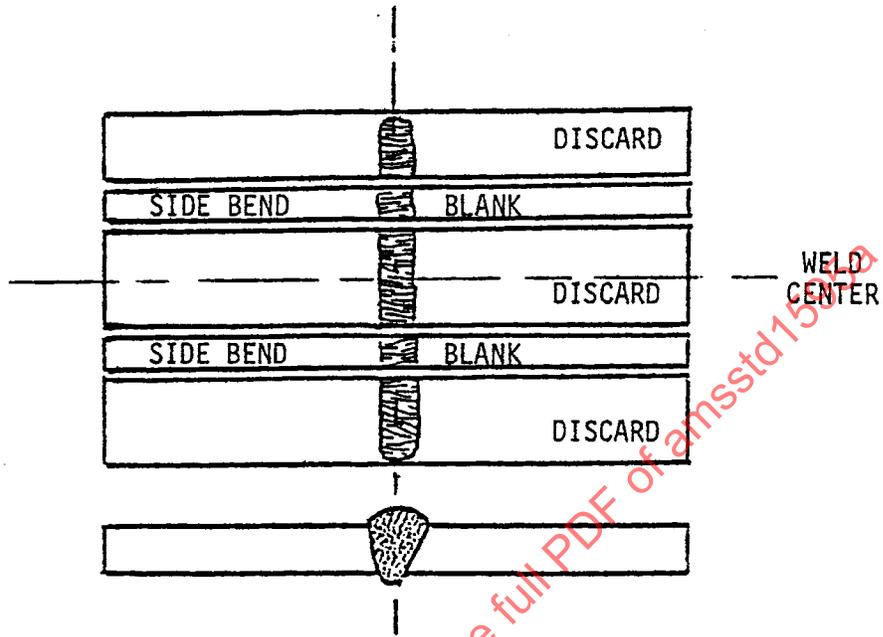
Blank locations for bend specimens in groove-welded sheet.
